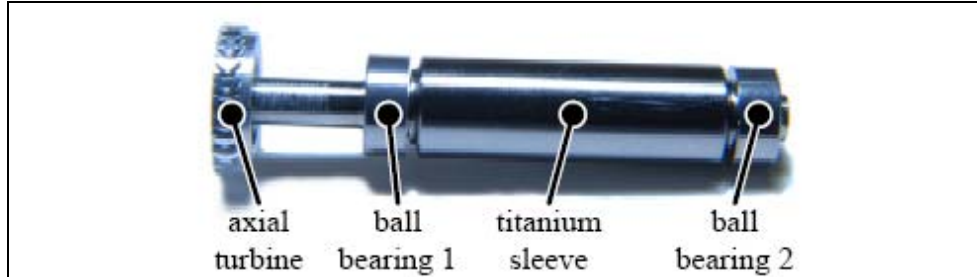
Impulse Turbine and Rotor with Assembled High Speed Bearings⁵.
